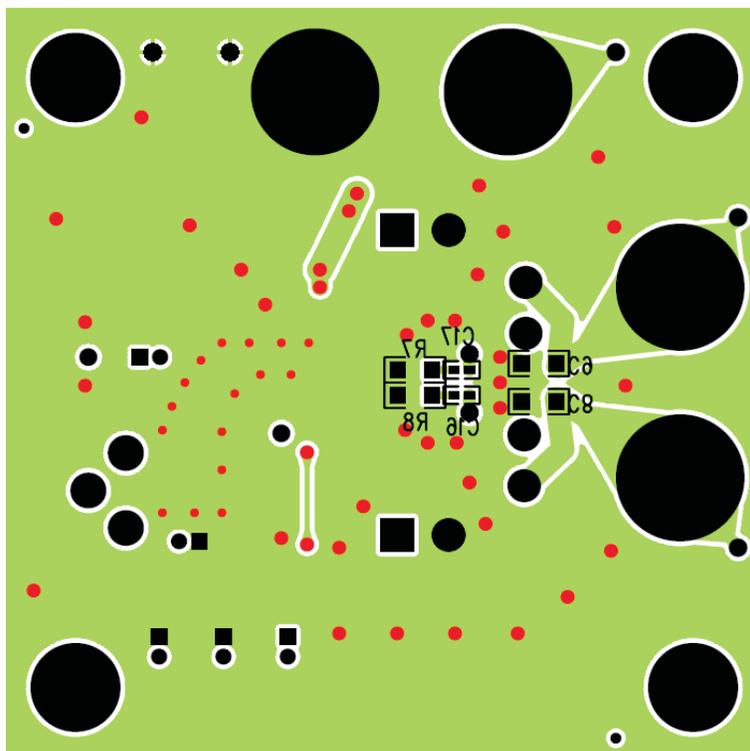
TPA3106D1 EVM – Bottom Side Layout
